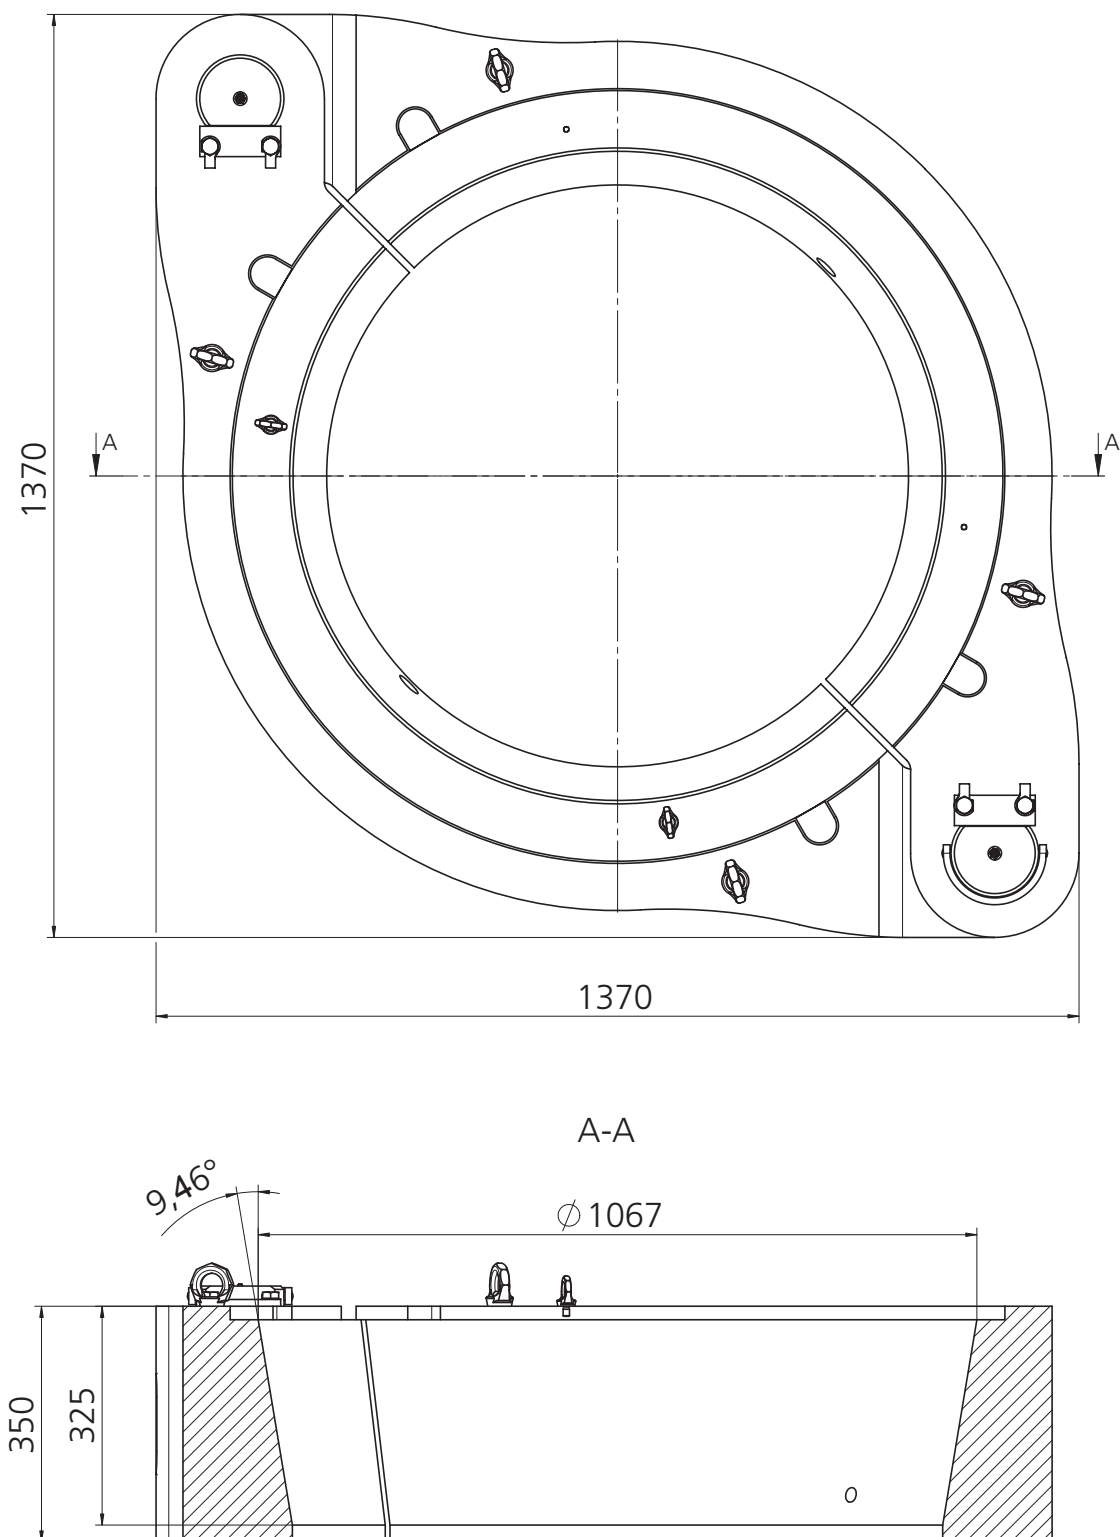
Principle drawing of a HCS 200-36" main dimensions
